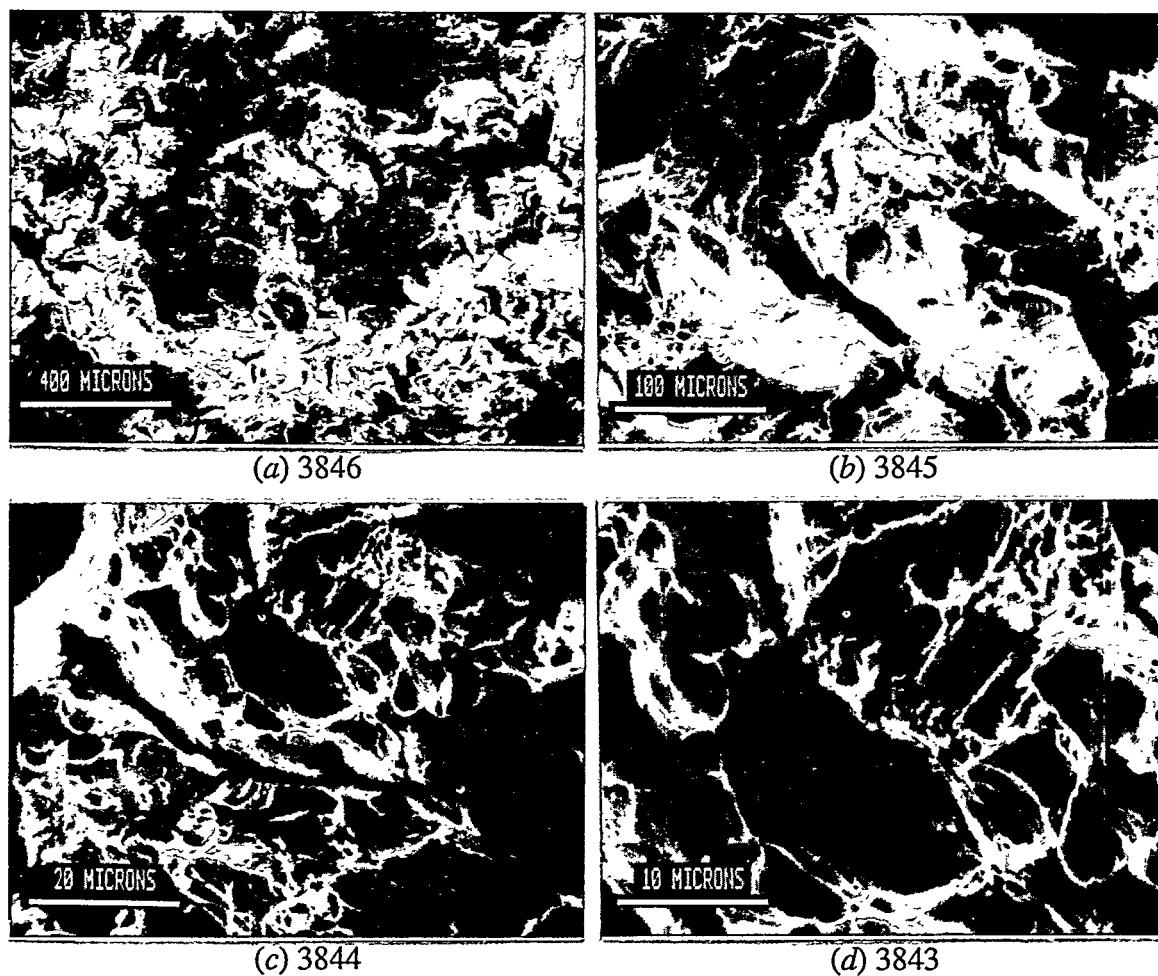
Fracture surface details of room-temperature tensile-tested specimens from vacuum-melted and extruded bar of FAPY near the specimen center: (a) 50 \times , (b) 200 \times , (c) 1000 \times , and (d) 2000 \times .
